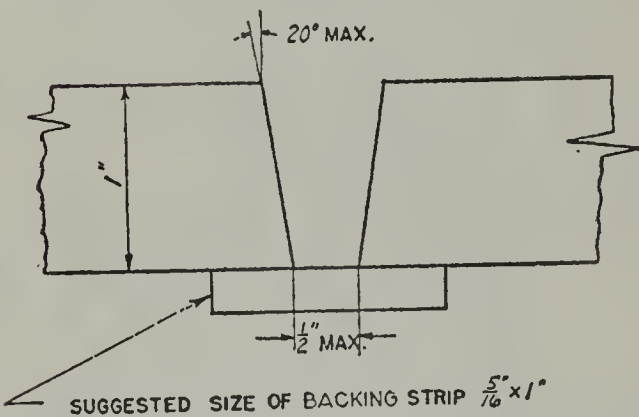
(a)—Butt Joint for Plate 1 In. Thick.
